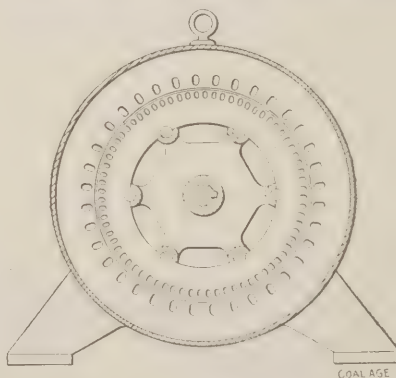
SECTIONAL VIEW OF INDUCTION MOTOR
